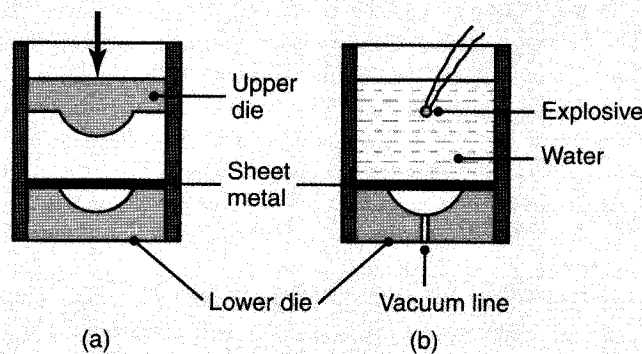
Two methods of making a dish-shaped sheet-metal part: (a) pressworking using a male and female die and (b) explosive forming using one die only.
